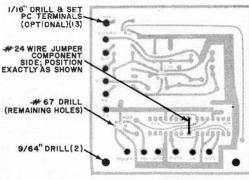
Actual-size printed board for the comparator module. Because of the complexity of the circuit, printed boards are a must for this project.
